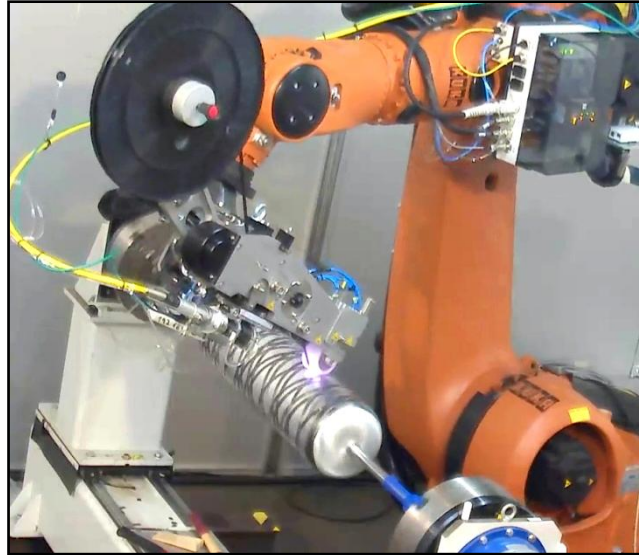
Laser Assisted Tape Placement machine at the CETIM manufacturing facility
